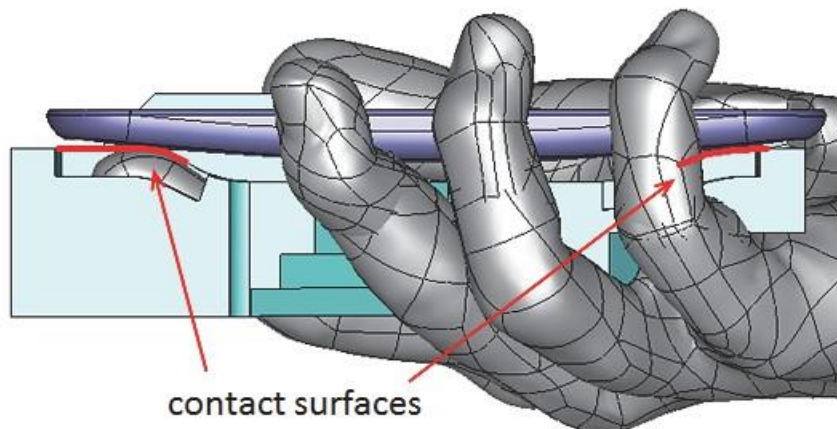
Wide Grip Palm Spacer Contact Surfaces
